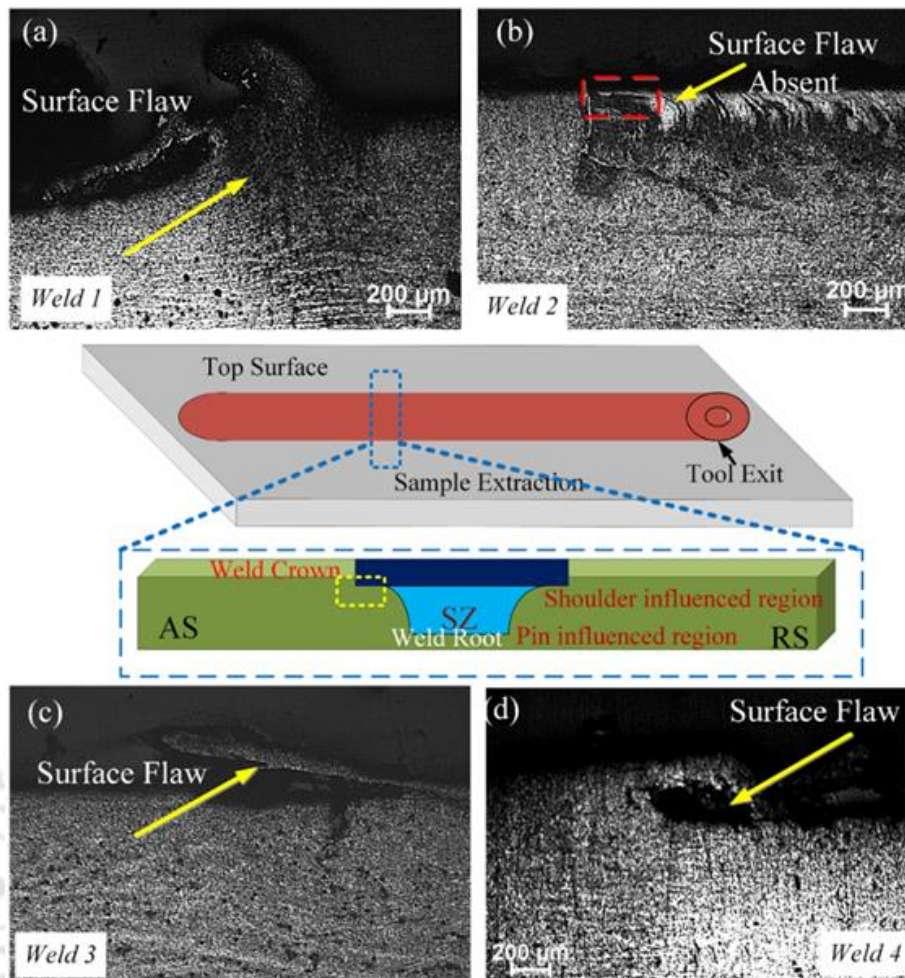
Micrograph appearance of weld joints at the top surface: (a) weld 1, (b) weld 2, (c) weld 3, and (d) weld 4
